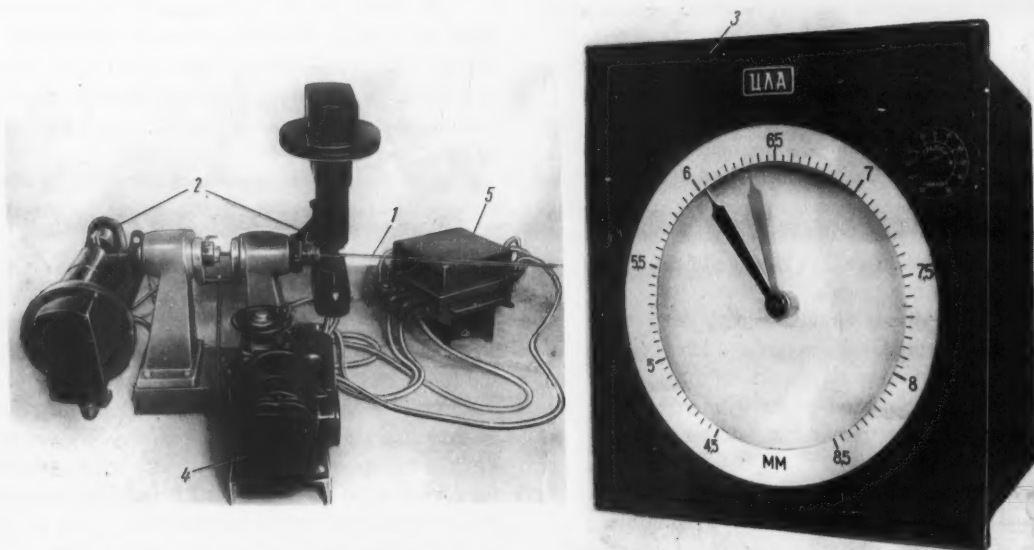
Apparatus for measuring the diameter and ovalness of the wire: 1) Wire being measured; 2) measuring heads; 3) two-hand dial for dimension readings; 4) reversing mechanism; 5) power pack.
